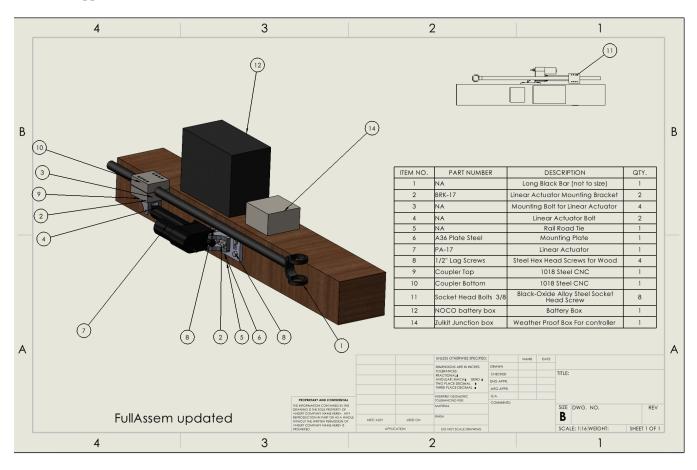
FINAL ASSEMBLY DRAWING WITH BOM.
